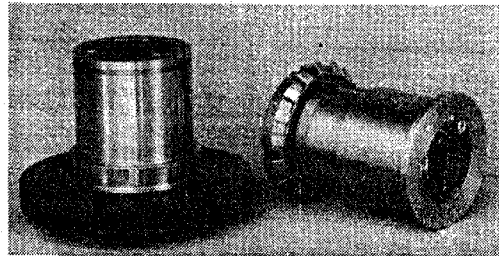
Shaft couplings made from Vega crankshaft hub (left) and solid steel (right) for Mazda.
